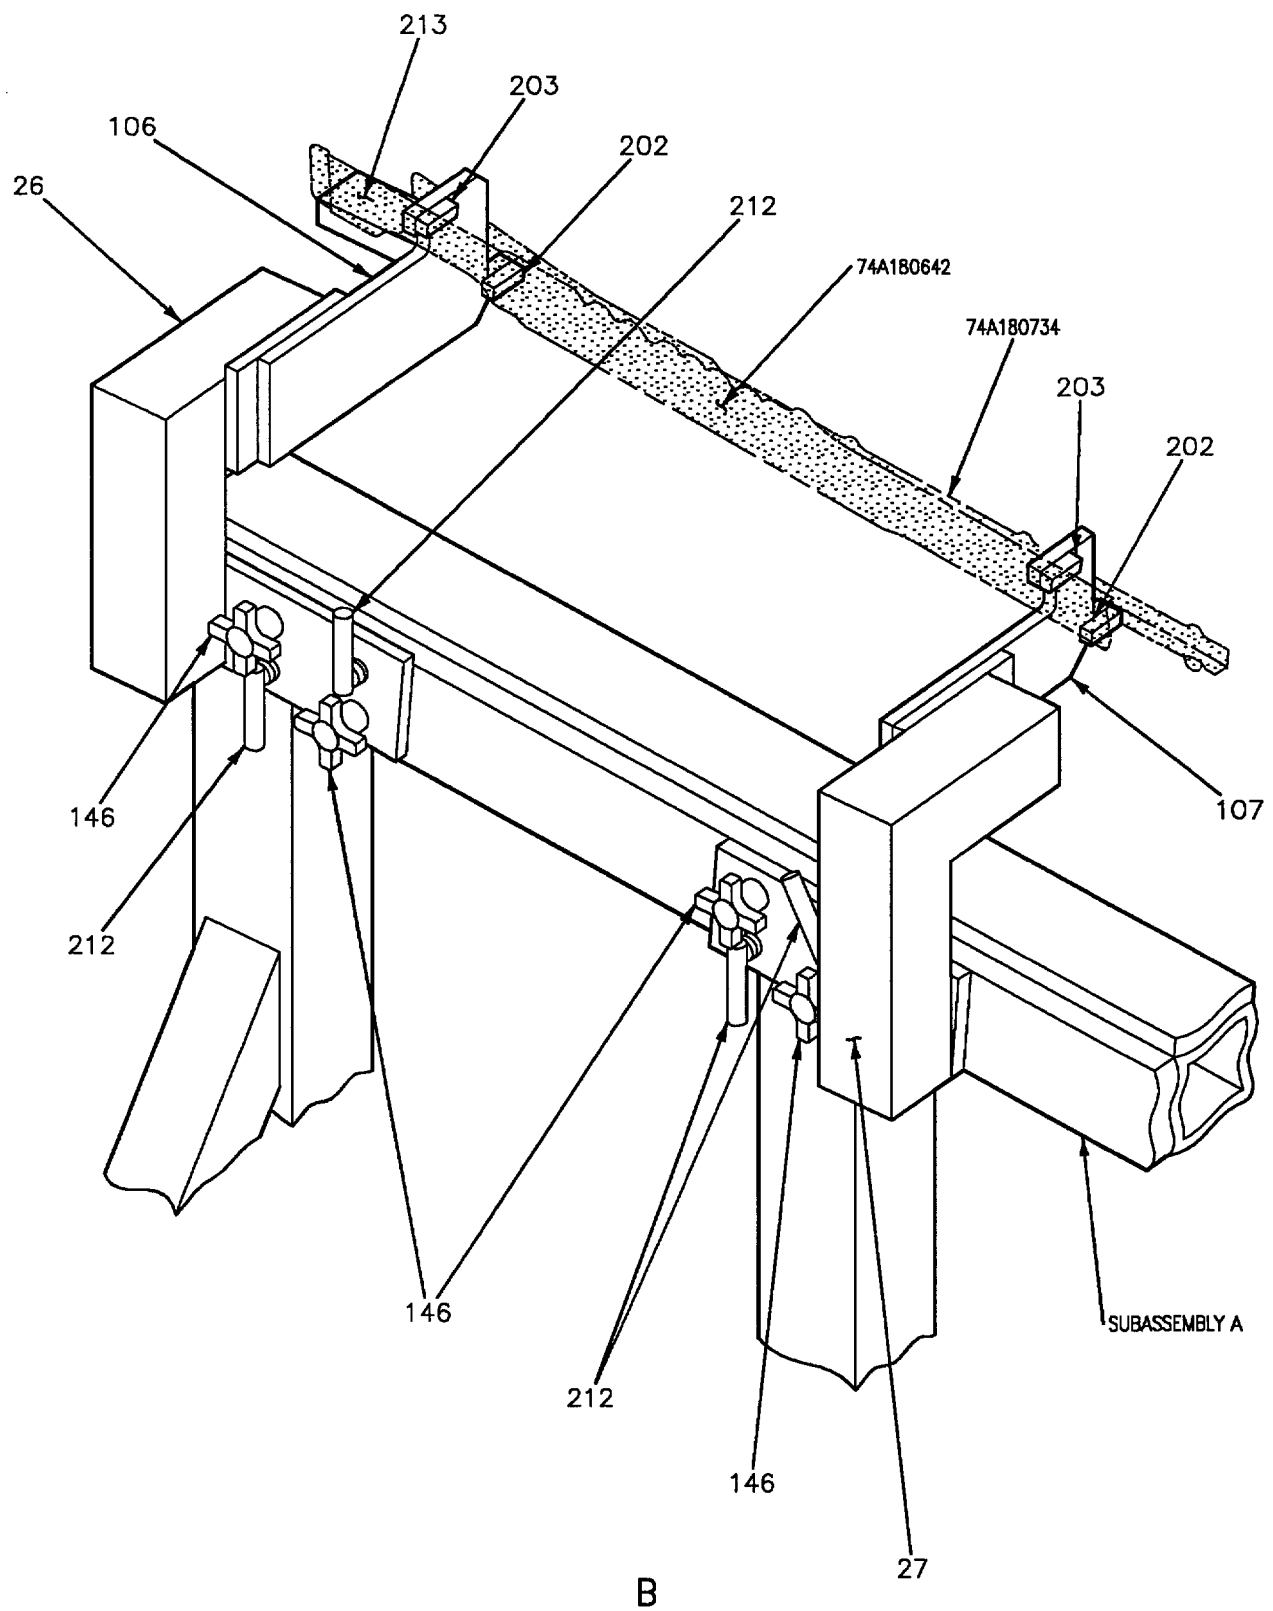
Stringers, 74A180642 and 74A180734 (Sheet 3)
